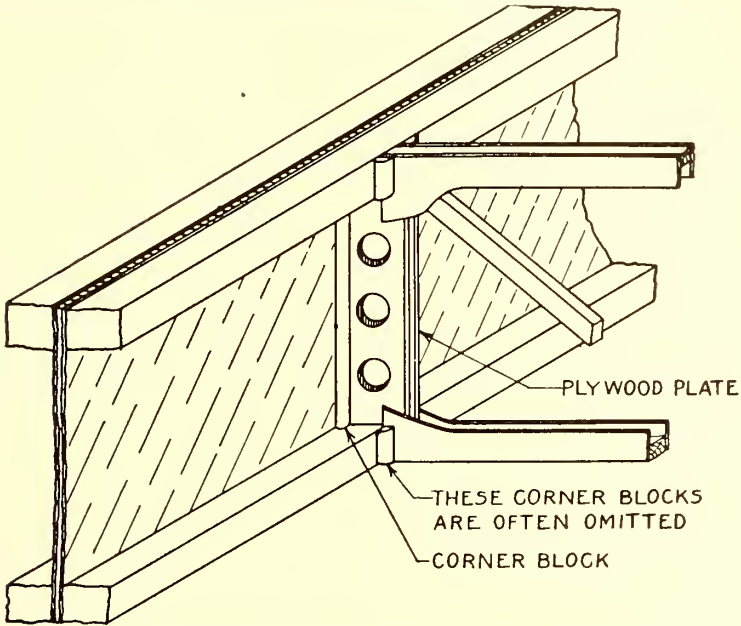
Typical Rib Attachment to I-Beam.
